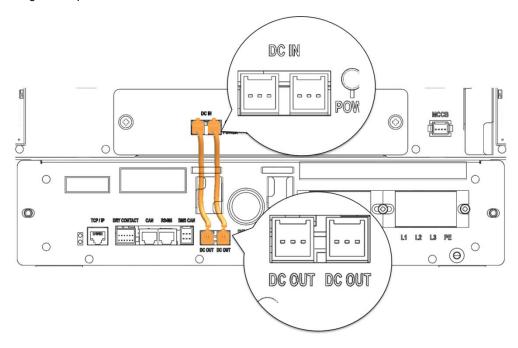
DC Power Cables from SMPS Assembly Type A to Switchgear
